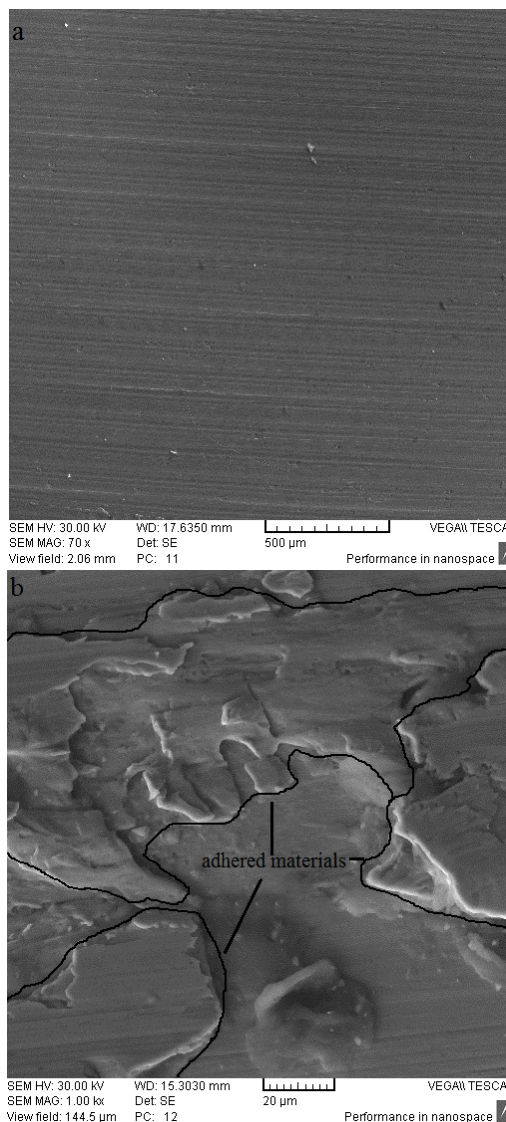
SEM image of machined surface of workpiece after turning under a) MQL method along with micro-texture tool and b) wet mode along with non-texture tool
